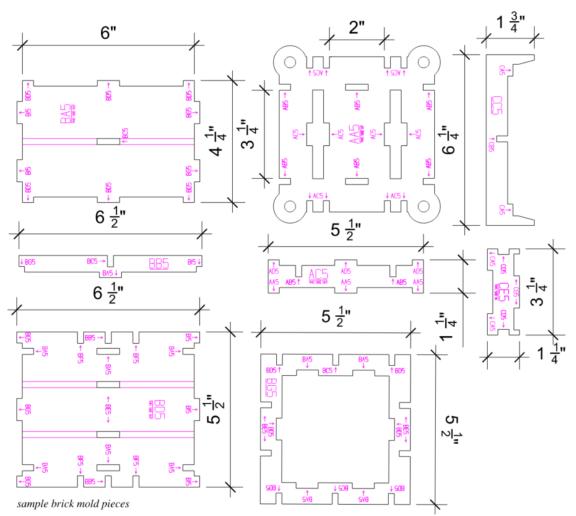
Dimensioned Mold Part Drawings from Precious Plastics
